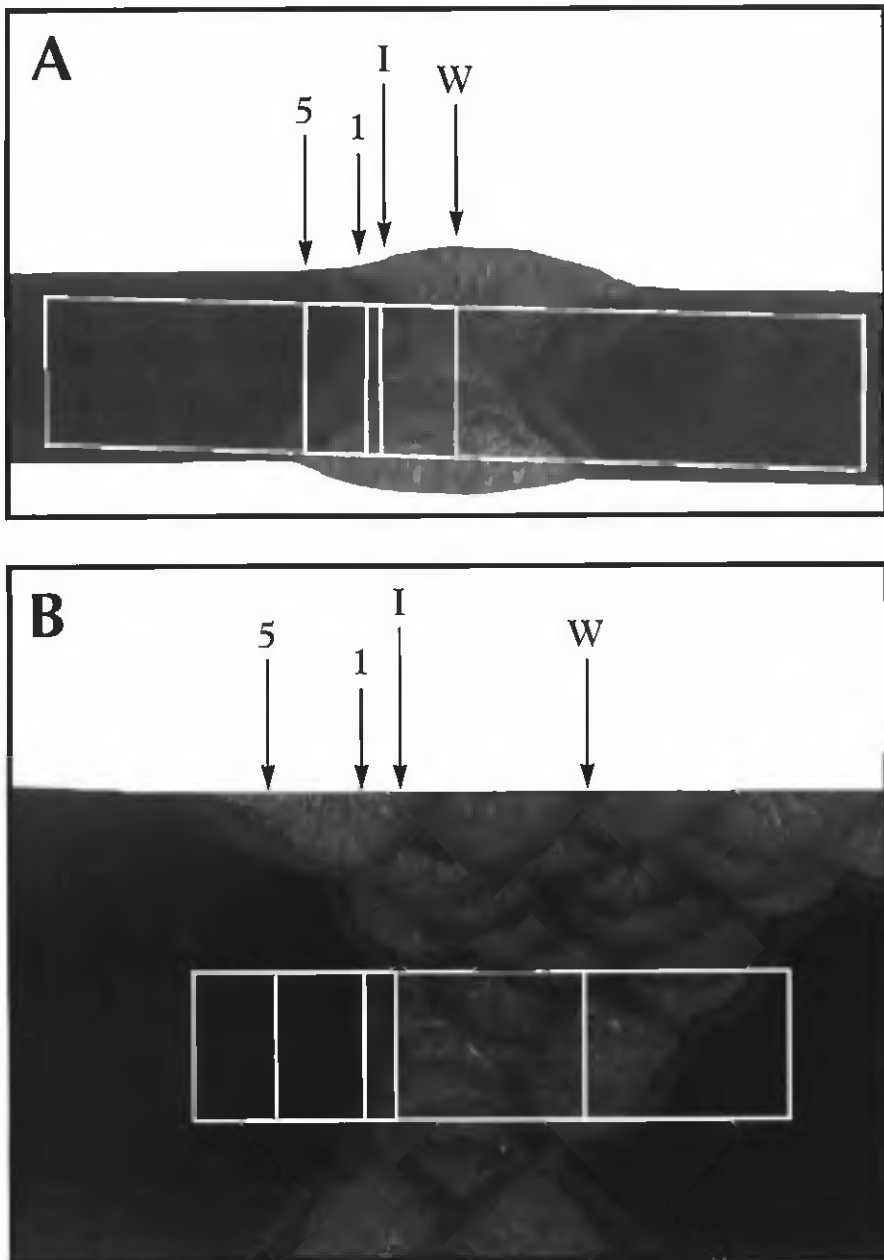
Transverse weldment sections showing locations of Charpy V notch. A — $\frac{1}{2}$ in. FCA Weldment 3; B — 1 $\frac{1}{4}$ -in. submerged arc Weldment 9. W = weld metal, I = weld interface, 1 = 1 mm, 5 = 5 mm.
